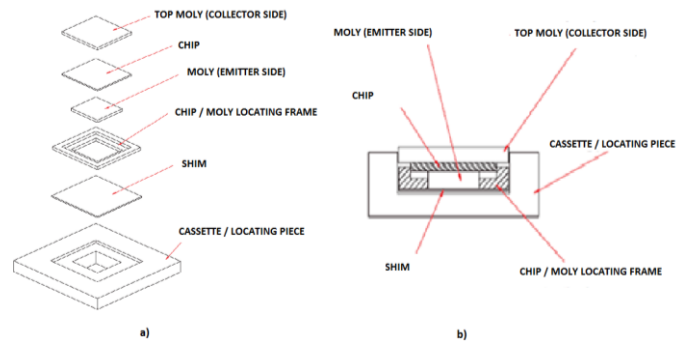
a) Exploded view of chip locator; b) Compressed view of chip locator. [13]
